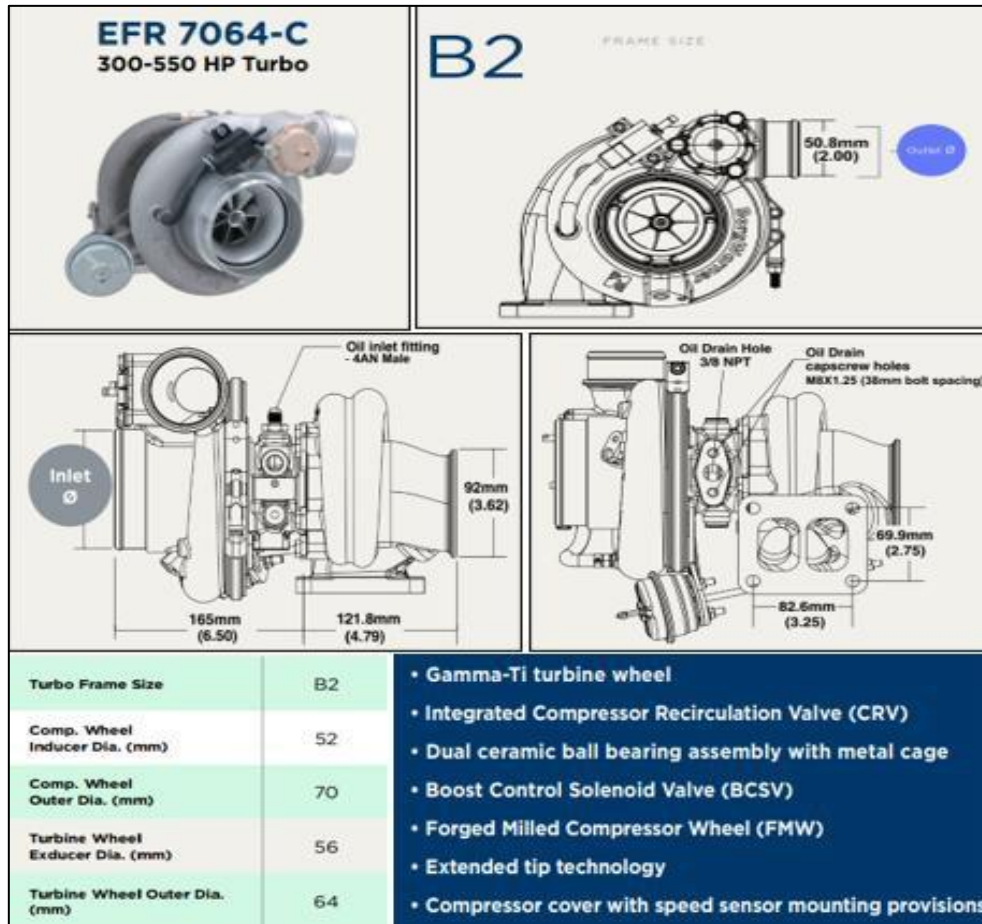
EFR7064-C twin scroll turbocharger & frame dimension
